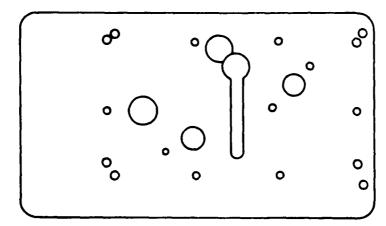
TOP AND CENTER MOTOR DRIVE PLATES
